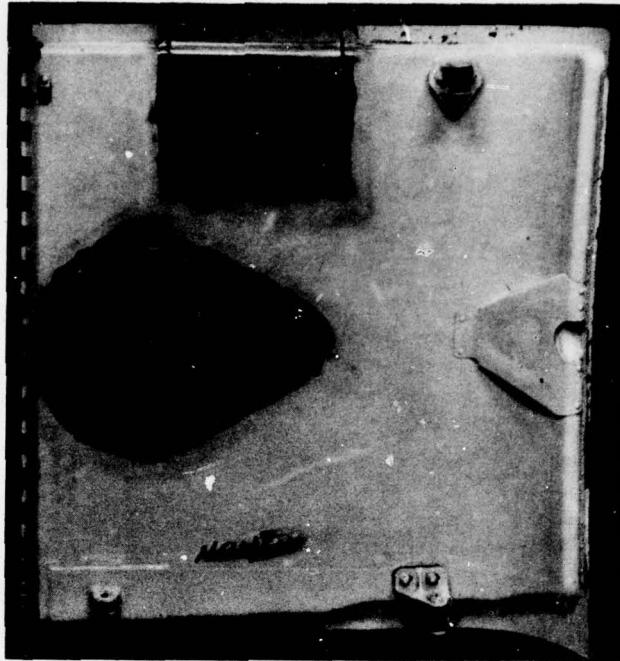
T-38 Main Landing Gear Door After Bonding the Repair Details
